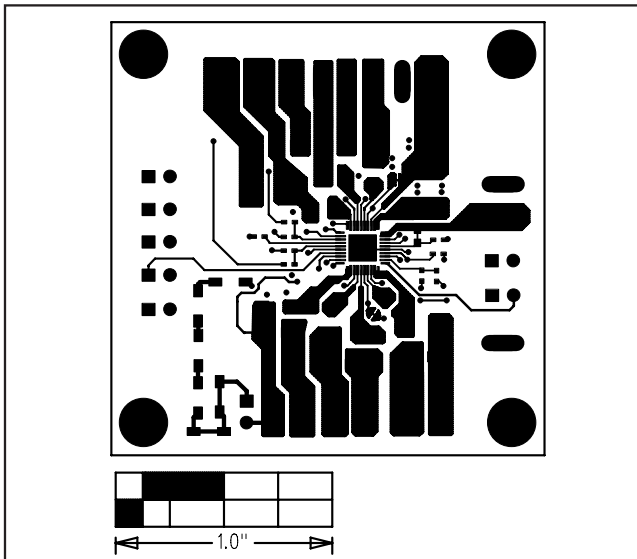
MAX8680 EV Kit PCB Layout—Top Layer
